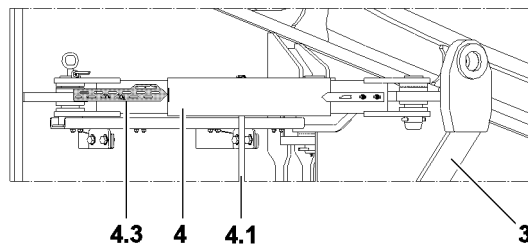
Adjustment of adjustment sleeves for lifting the complete crawler carrier
